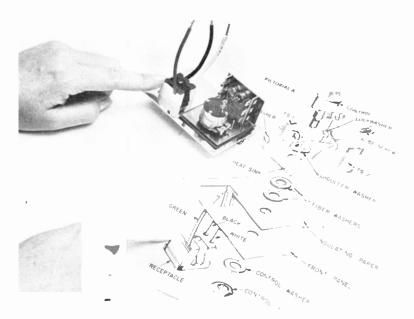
Pictorial diagram shows how the parts are mounted.
